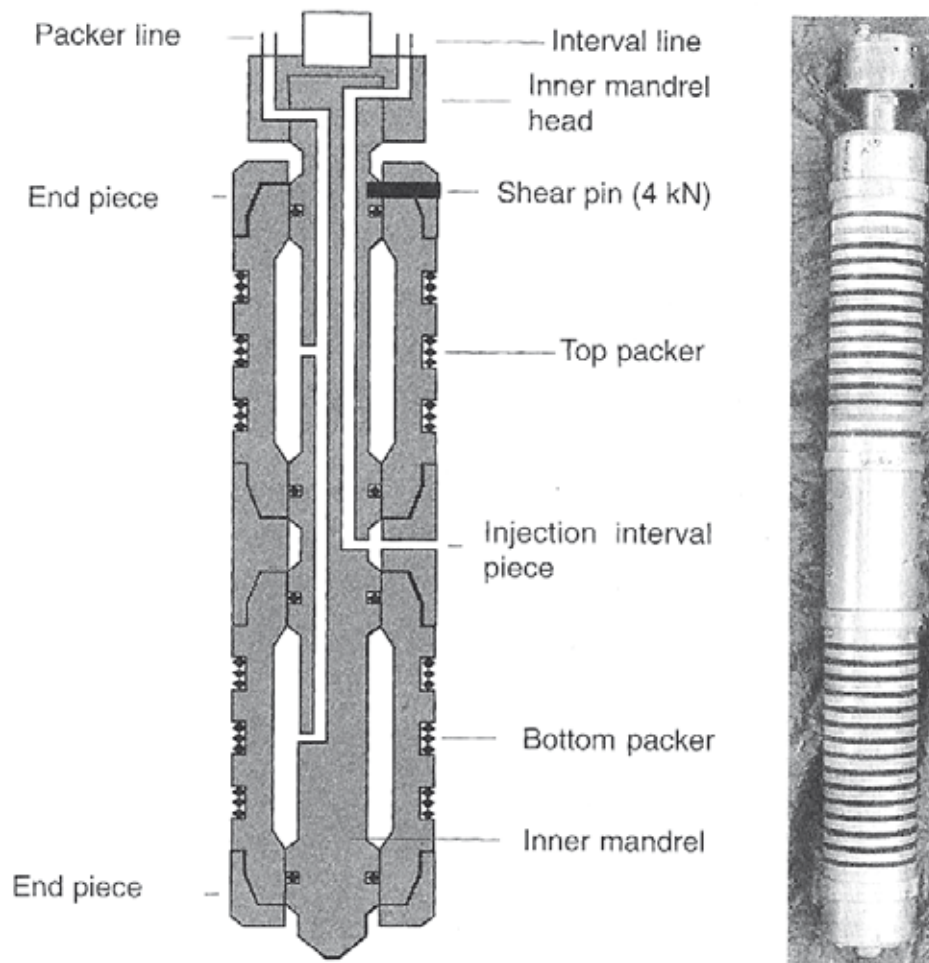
Schematic diagram and photograph of the aluminium straddle packer tool
